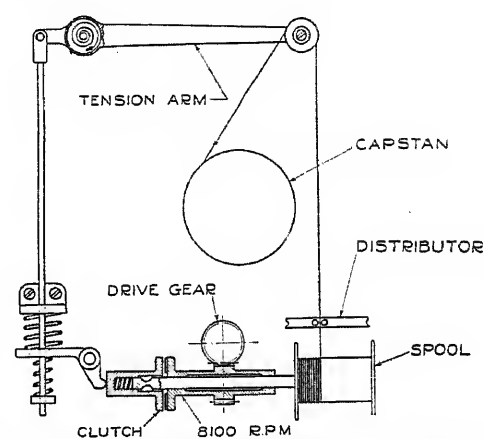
AUTOMATIC TENSION MECHANISM OF NO. 3 WIRE-DRAWING MACHINE
